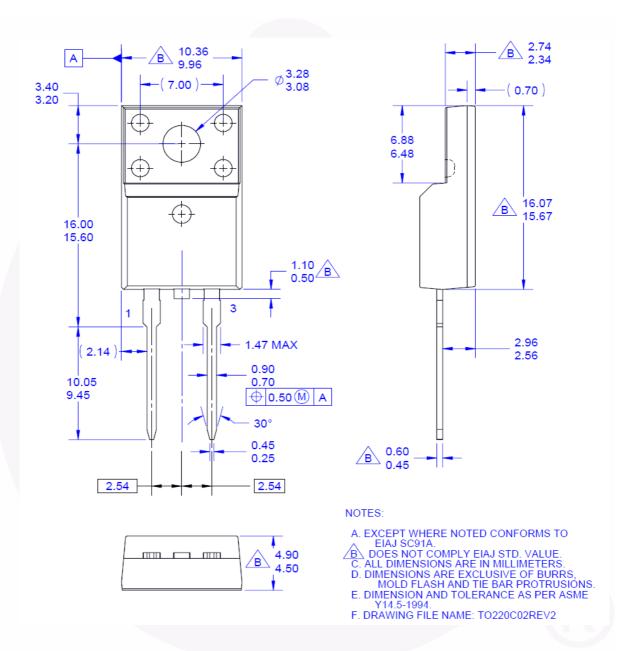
TO-220F 2L - 2LD; TO220; MOLDED; FULL PACK
